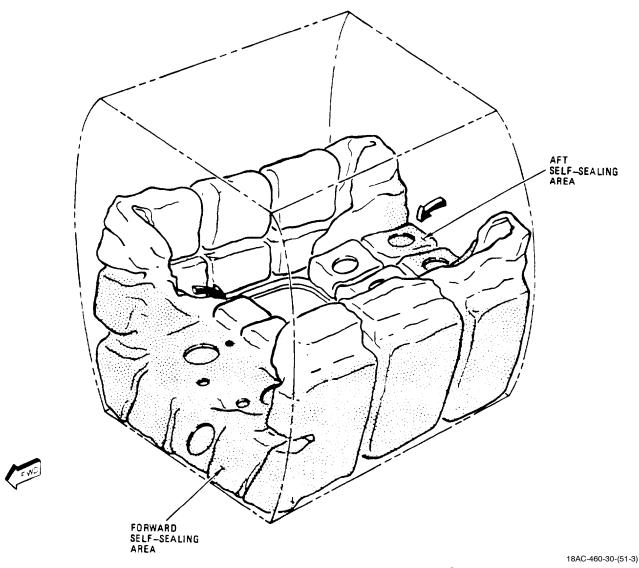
Removal - No. 2 Fuel Tank Folding (Sheet 3)
